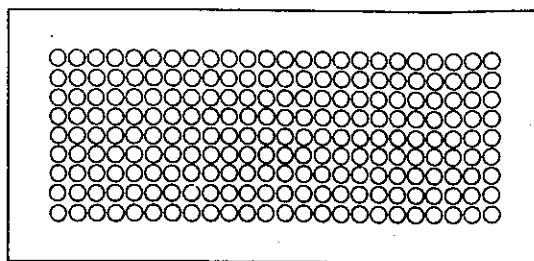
A drilling jig made of sheet metal 3.2-mm (1/8-inch) thick is handy for making your own perforated stock for areas requiring ventilation. Jig is about 20 cm (8 inches) long and 7.5 cm (3 inches) wide. Holes should be about 6.5 mm (1/4 inch) in diameter.
